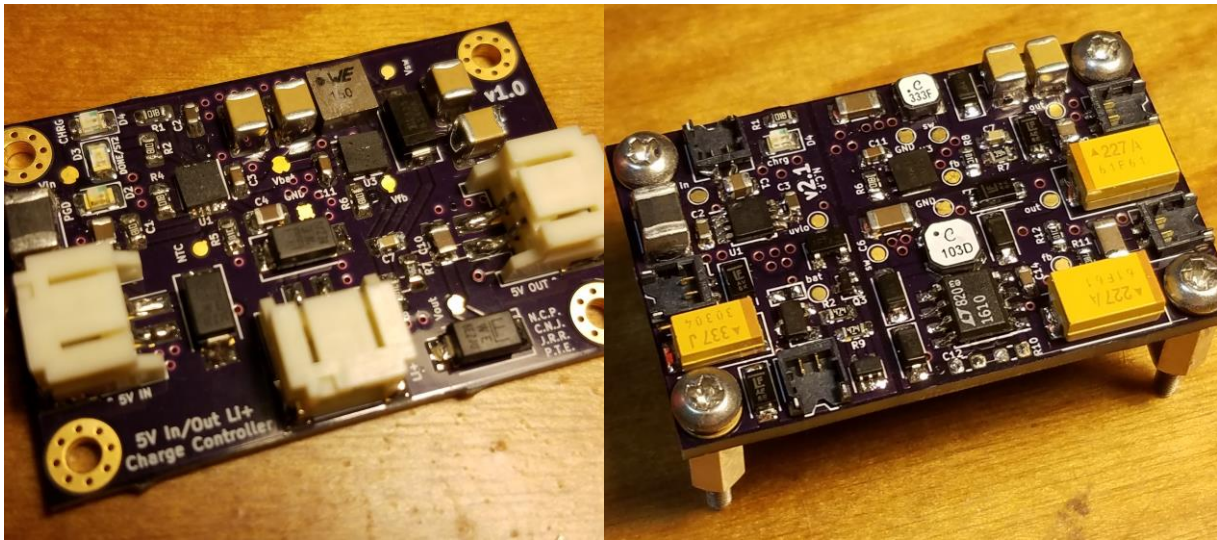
Final Assembled Boards: Version 1.0 (left) and Version 2.1 (right)
